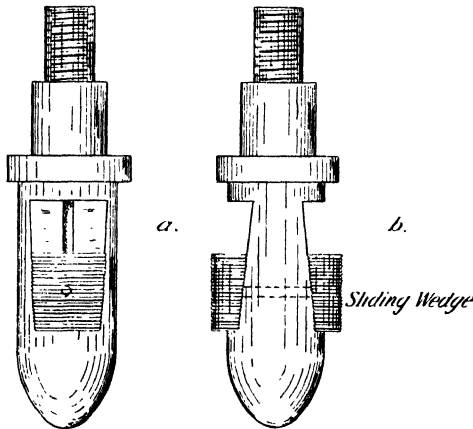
Pipe Spear. (a) Front View ; (b) Side View.
